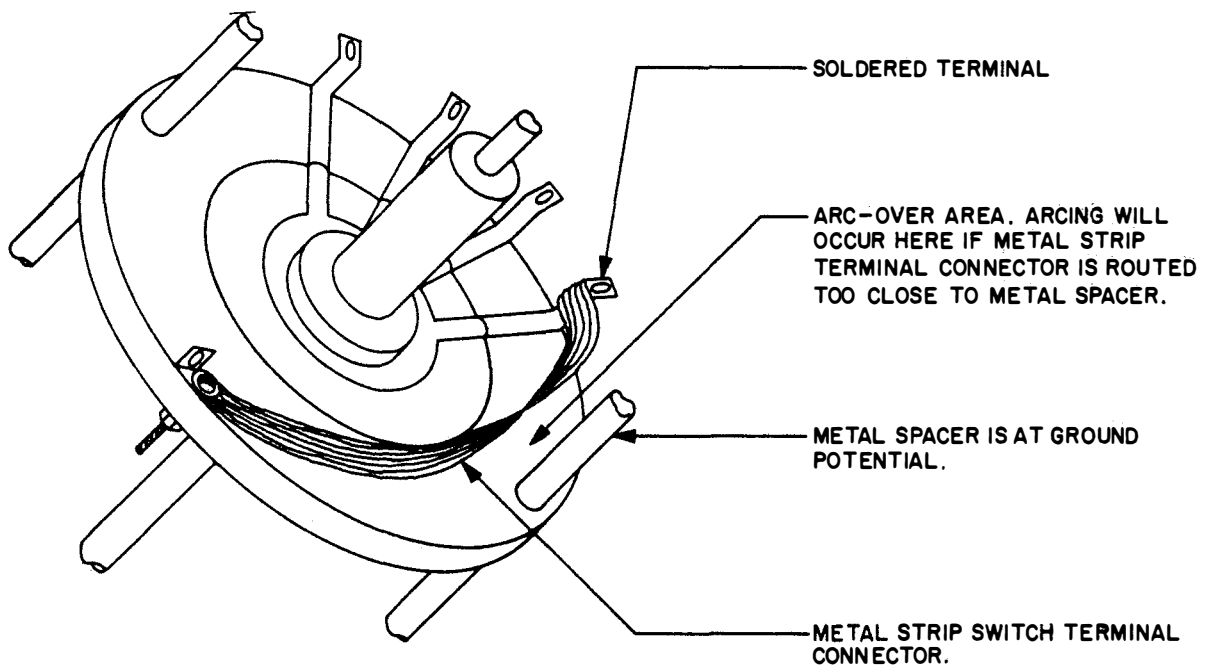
S-6A Section of AM-2061/URT, S-6 and S-5 Switch Assembly
